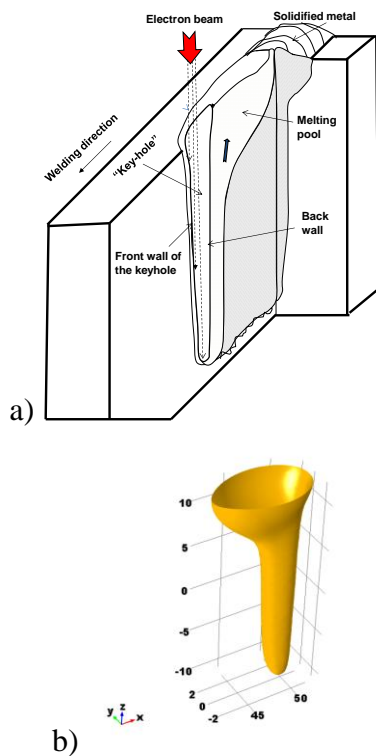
a) Scheme of the: electron beam welding seam formation; b) melting pool
